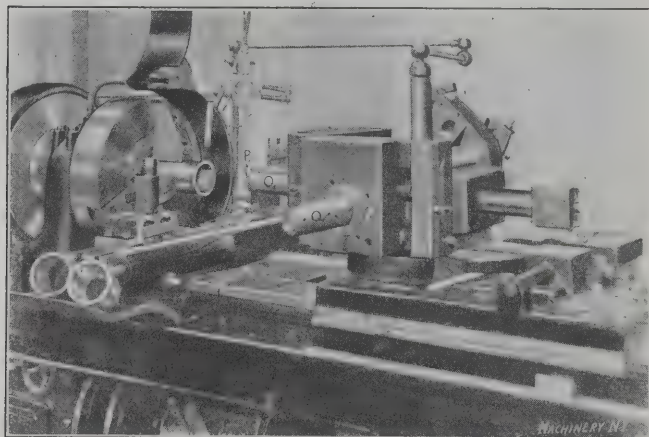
Boring and Facing the Bottom of the Bowl with Turret Tools manipulated by the Cross-slide
